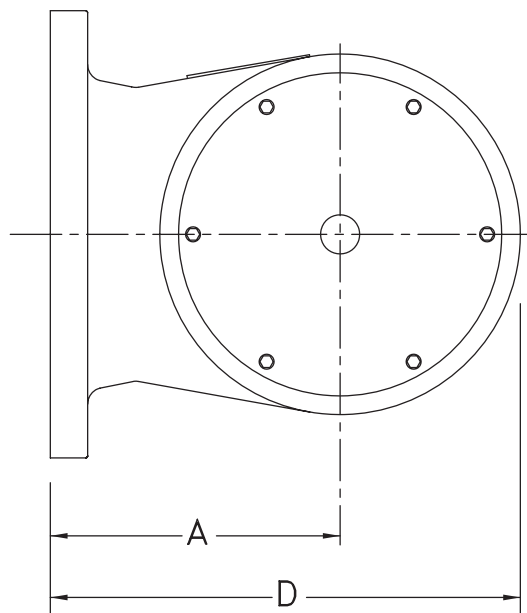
MODEL 3650B PRESSURE OR VACUUM RELIEF VALVE (HIGH SETTING)
